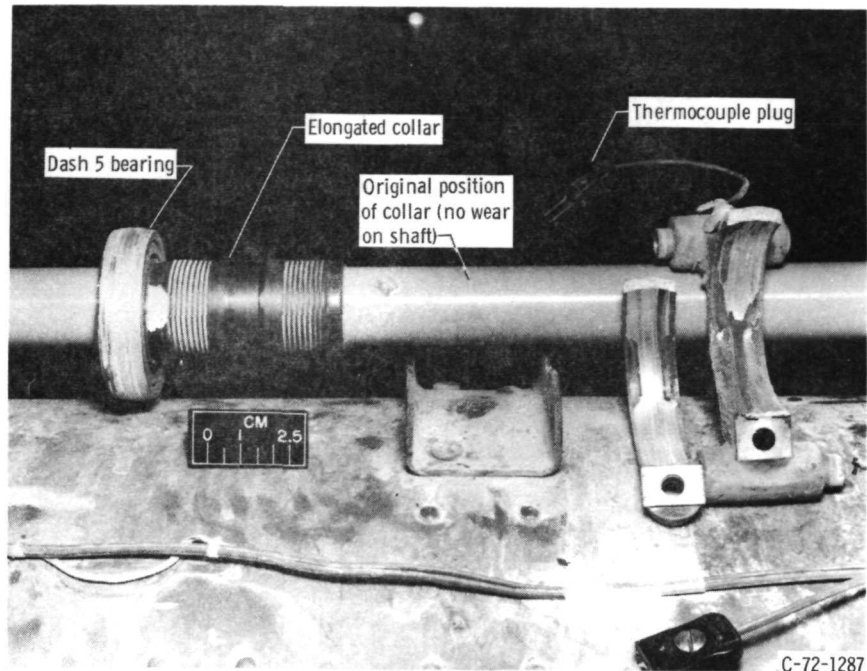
Disassembled hanger and bearing-collar assembly. Collar has been moved and no wear is seen on shaft.
